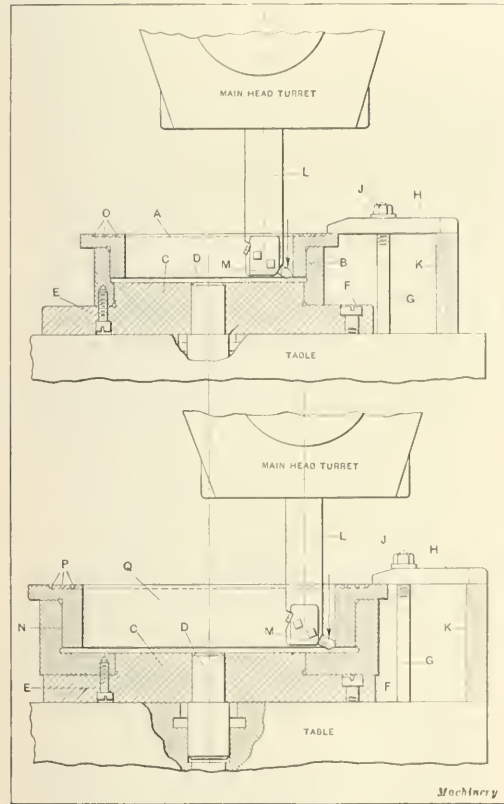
Simple Fixture for holding Three Sizes of Steel Flanges, while boring, facing and cutting Packing Grooves
